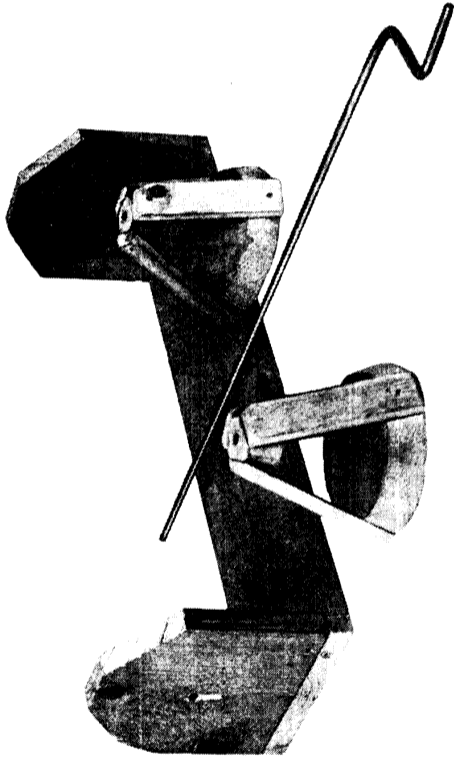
Component parts of the winder. The tapered supports allow various-sized coils to be held firmly
